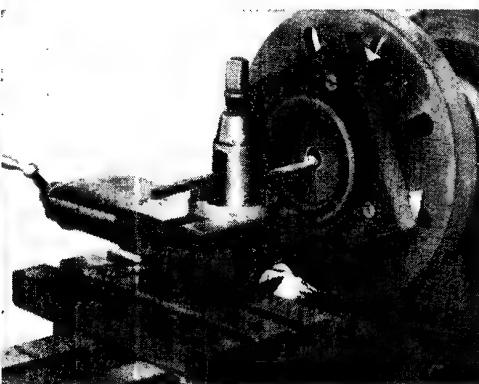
Enlarging the small central hole by means of a boring tool in the slide rest
